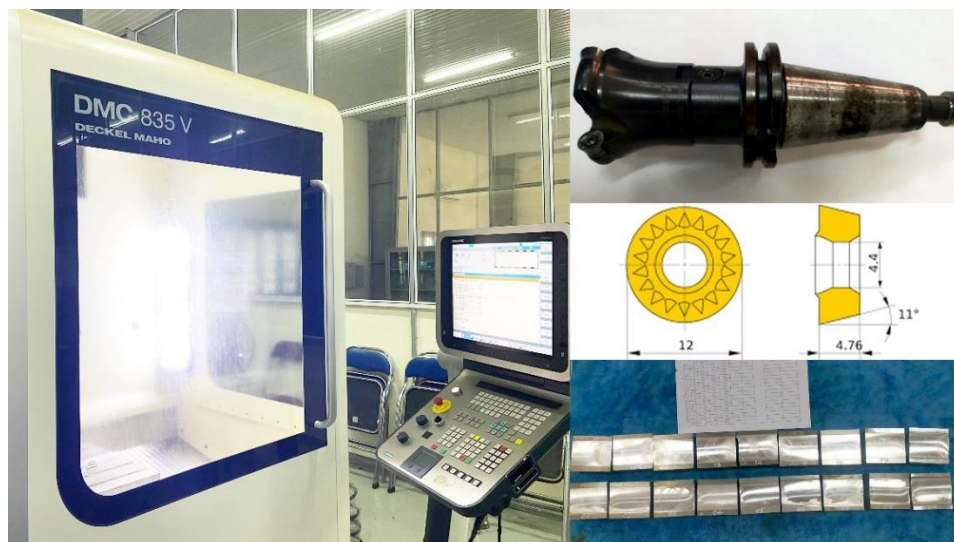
DMC 835V CNC milling machine, workpiece and cutting tool
